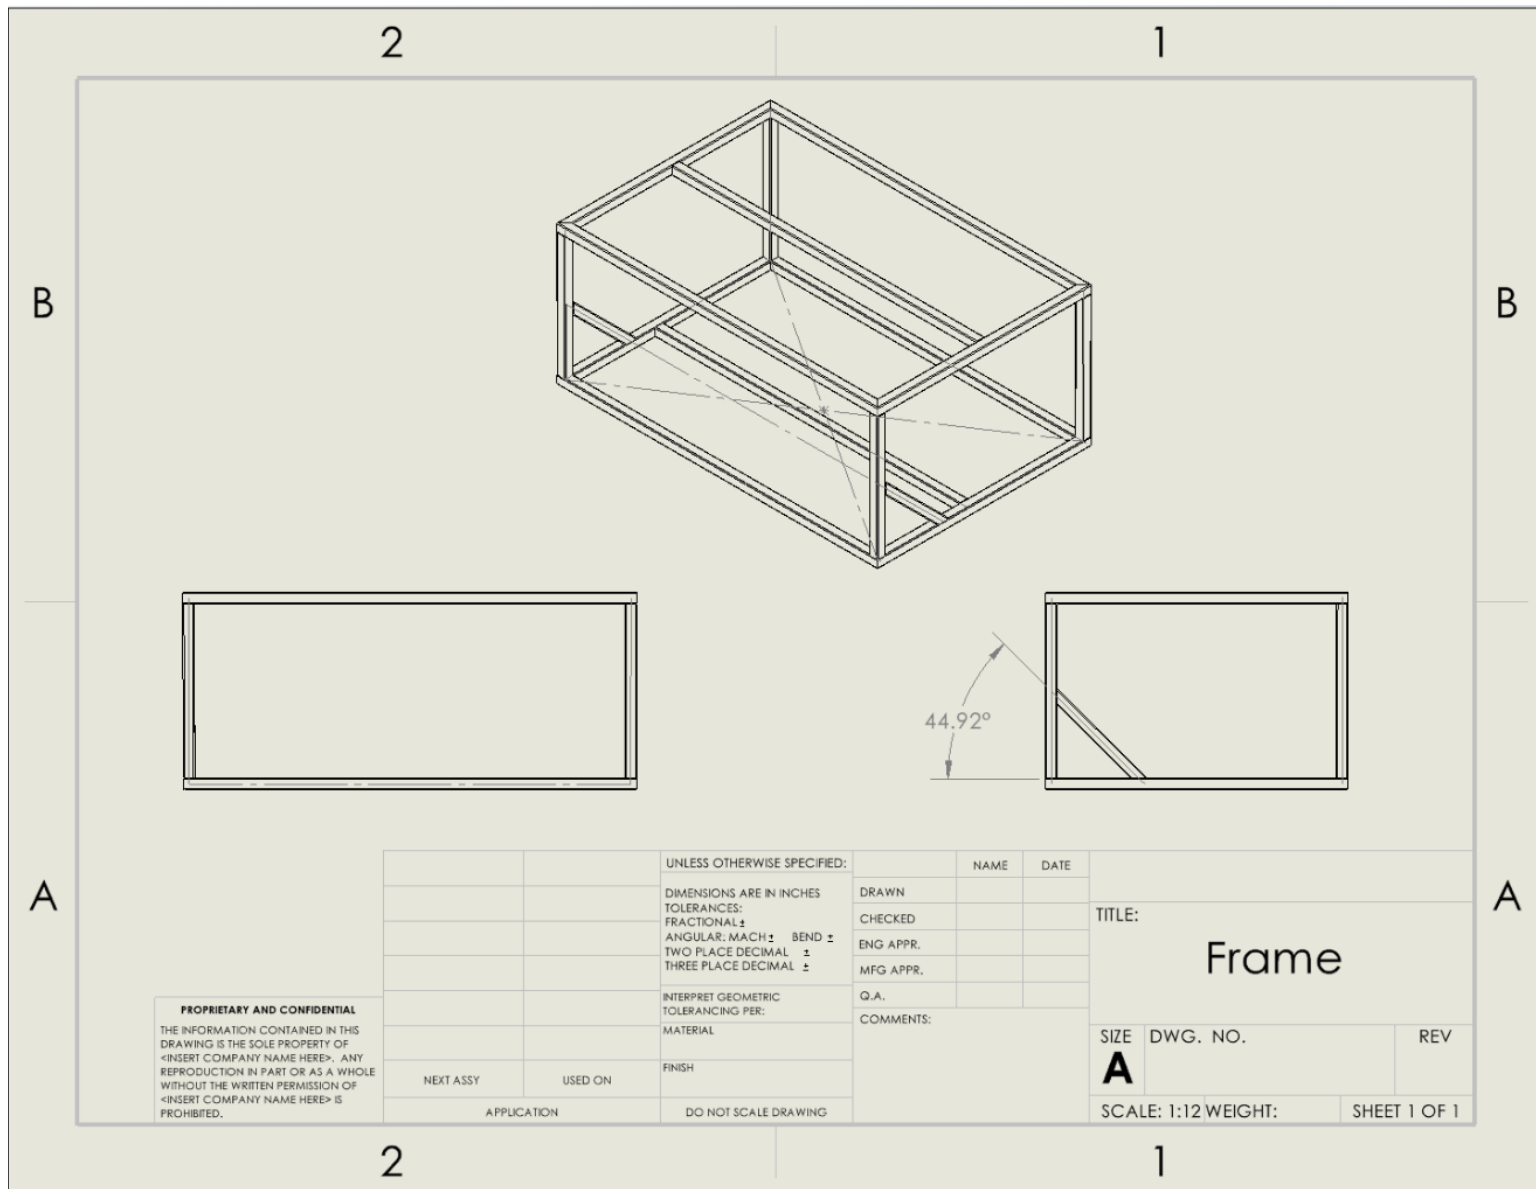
Final Frame Assembly of Shingling Robot Module (Lower Module)
